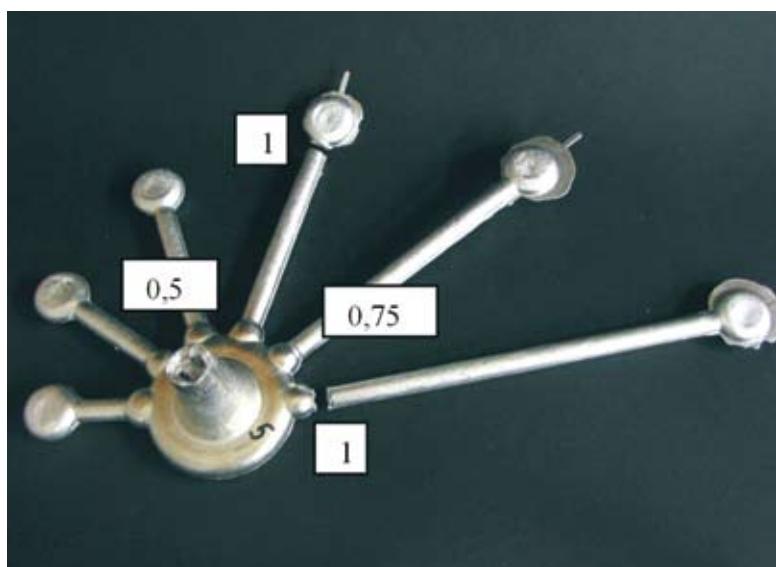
Star casting used to test hot cracking behaviour of the alloy
